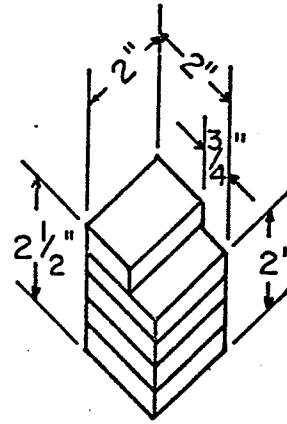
Assembly of Particleboard Specimen for Shear Test Parallel to Surface
